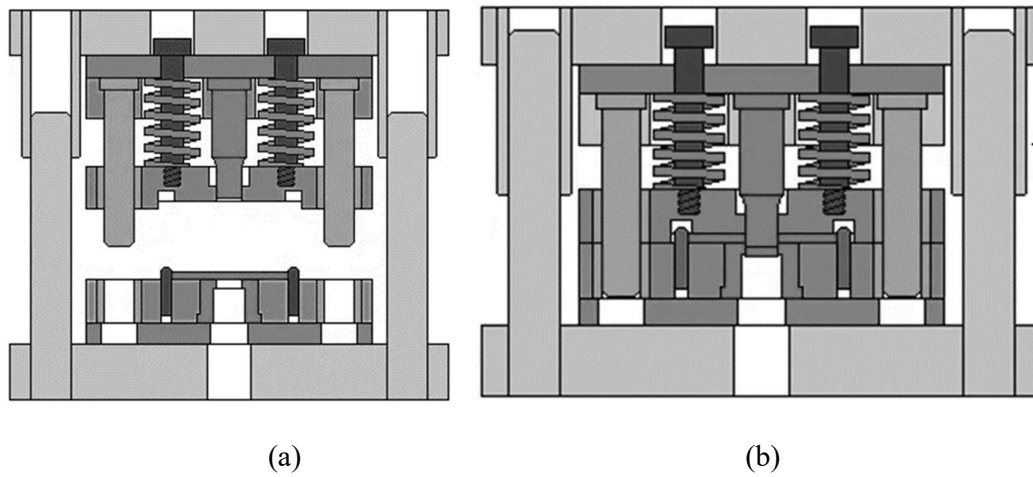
Die & mold tooling in Blanking (a) before (b) after the operation
